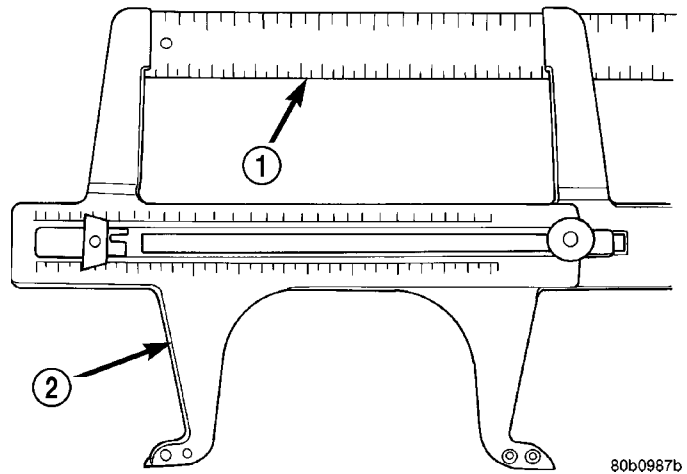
Setting Gauge To Park Brake Shoe Measurement
